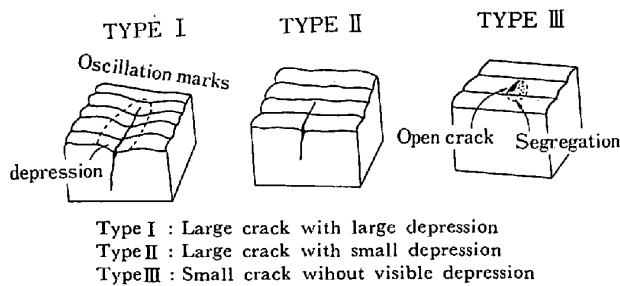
Typical longitudinal facial cracks of continuously cast slabs.
